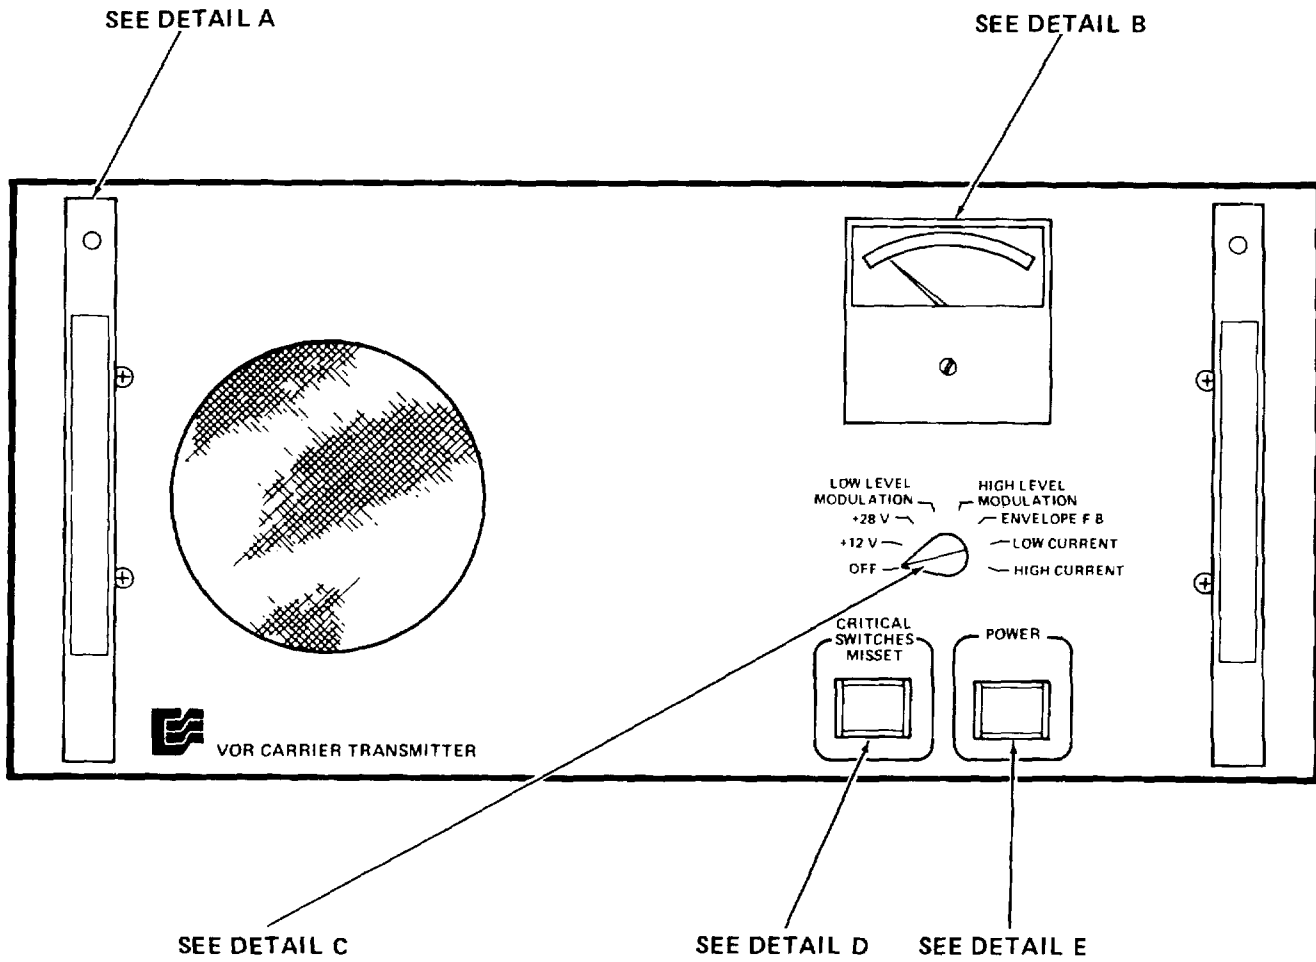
Radio Transmitter Front Panel and Chassis-Mounted Parts Location Diagram (Sheet 2 of 3)
